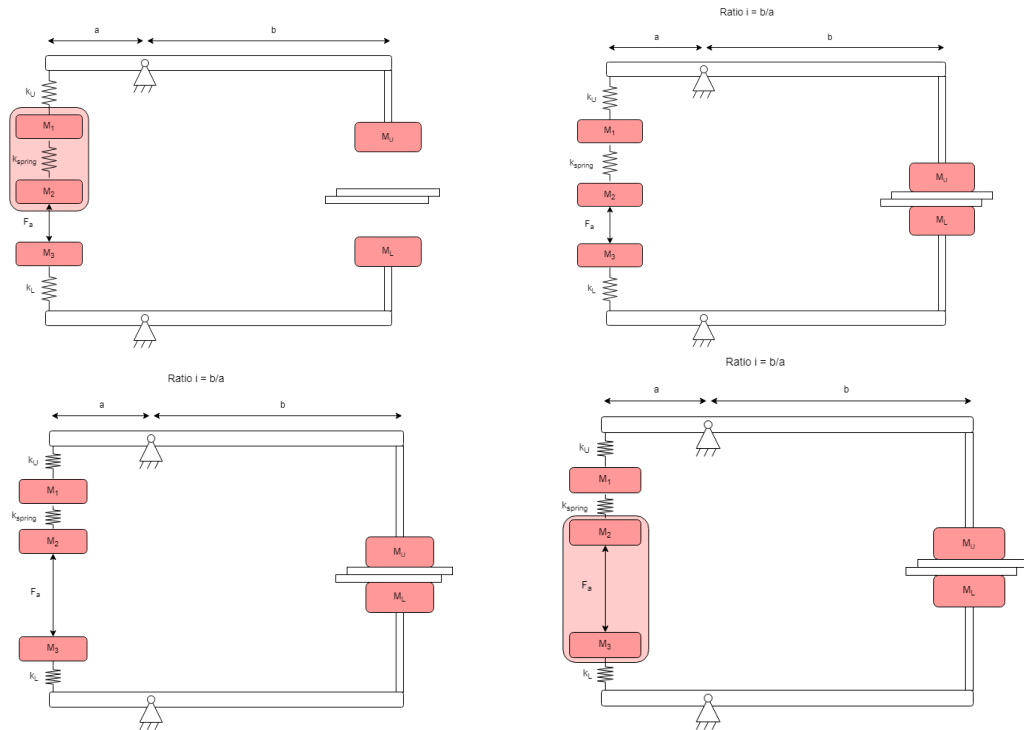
Dynamic schematic model of X-type welding gun throughout the welding process. (a) Gun at rest, arms are open and m_1 and m_2 act as a single mass. (b) Gun is closed and electrodes touch. (c) Electrode force builds up. (d) Model when welding, m_2 and m_3 act as a single mass with a rigid connection.
